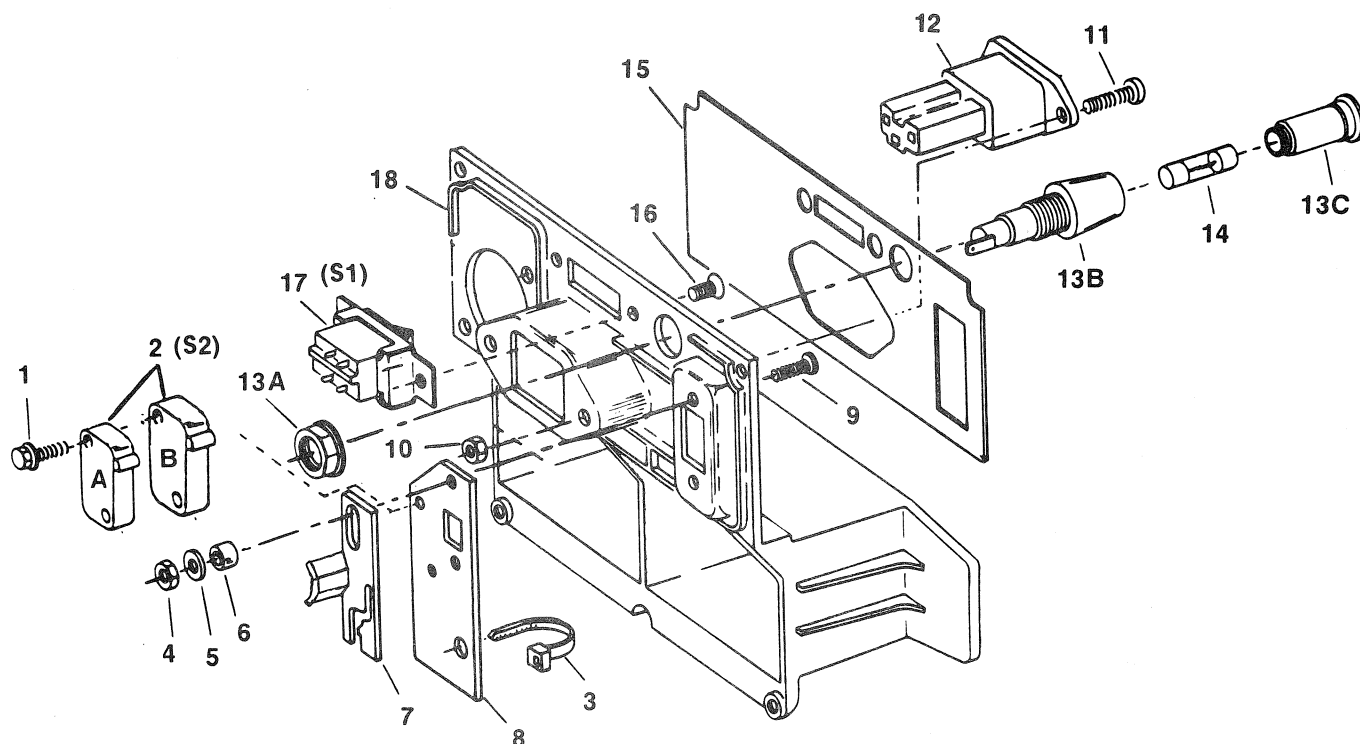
CORD WRAP ASSEMBLY (CODE C ONLY)
